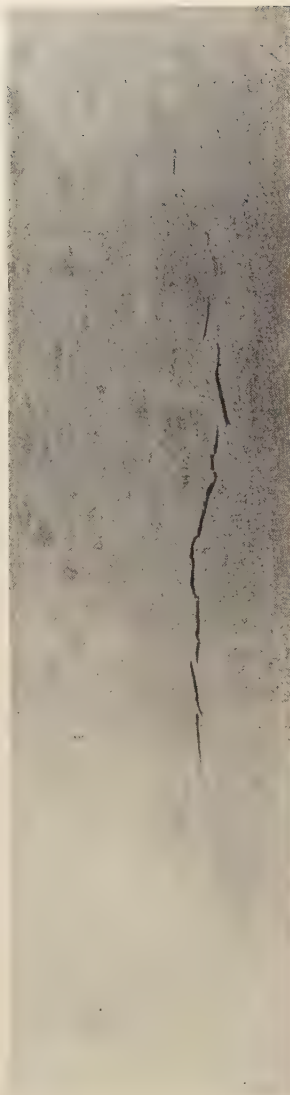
Internal Crack in Forged High-Alloy Steel.
